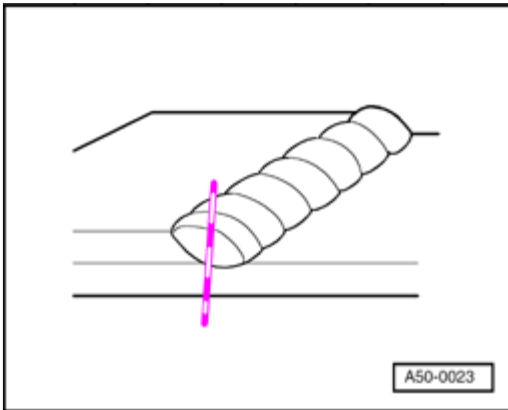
Separating Weld Seam At Center With Body Repair Saw
